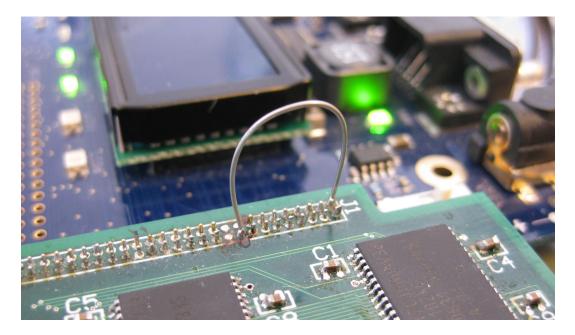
Wire soldered from chip enable pin to nearby VCC
